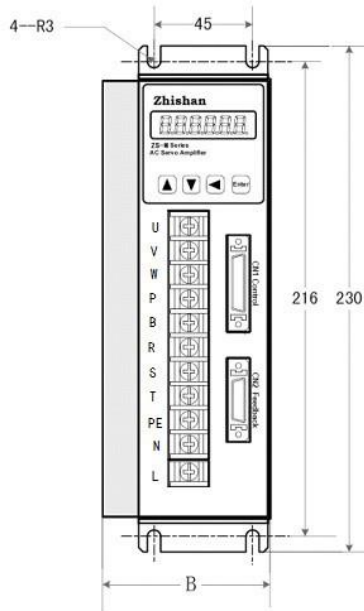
Front View of Mounting Dimensions of MK7-Series
